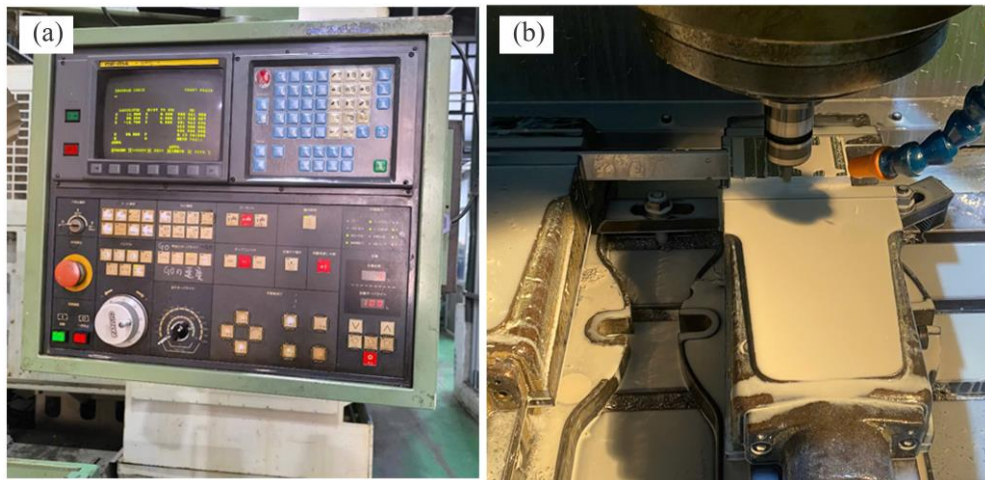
CNC machine used in the experiment: (a) control panel; (b) machining zone and workpiece setup.
